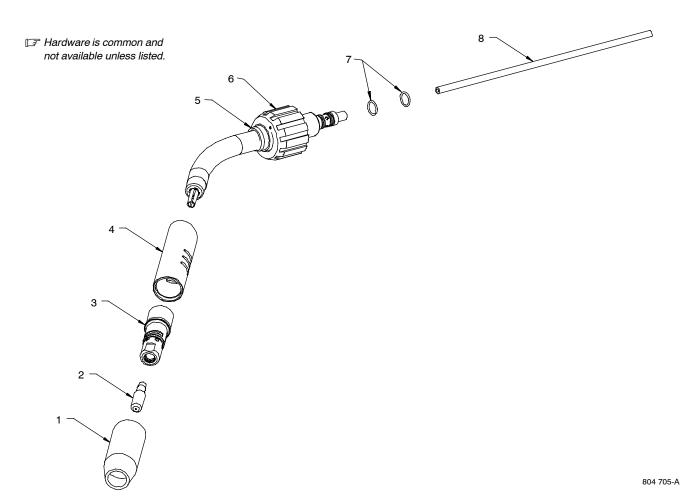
(Air) Head Tube Assembly Of Aluma-Pro Gun
